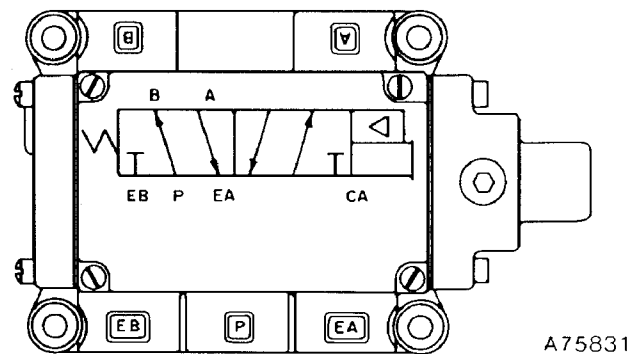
TURN VALVE ACTUATOR CONTROL VALVE
